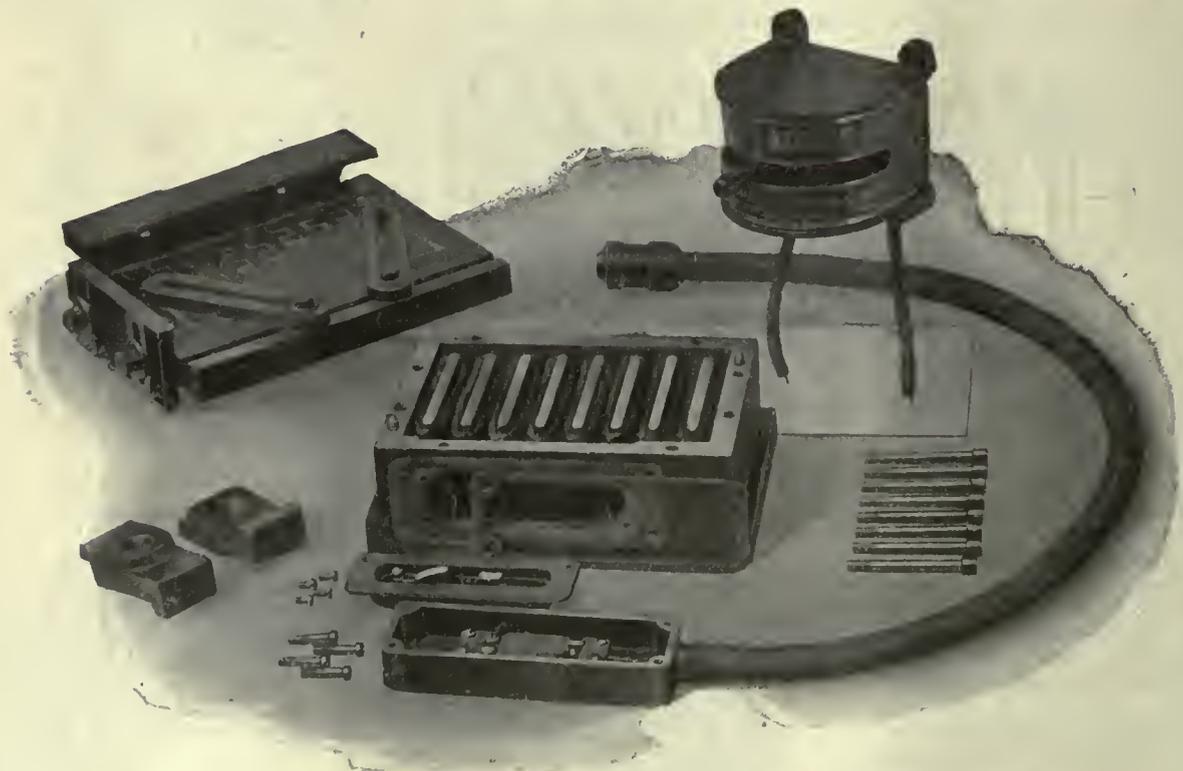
Complete disassembled view of 8 x 10 T-slot Simmons Unit-Pole Magnetic Chuck.
